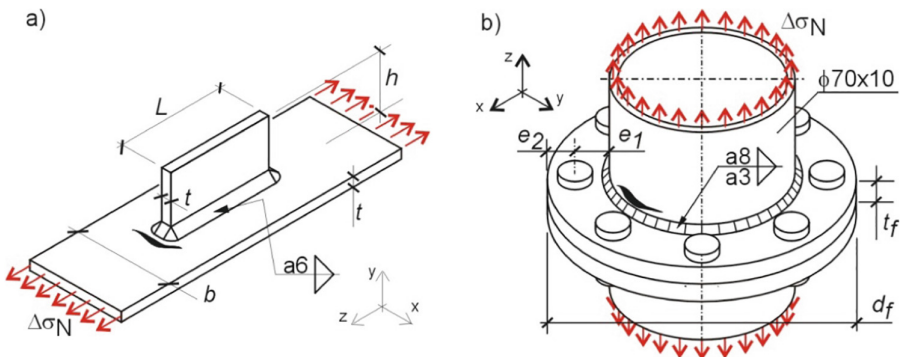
Investigated structural details; (a) longitudinal welded attachment, (b) bolted flange joints
